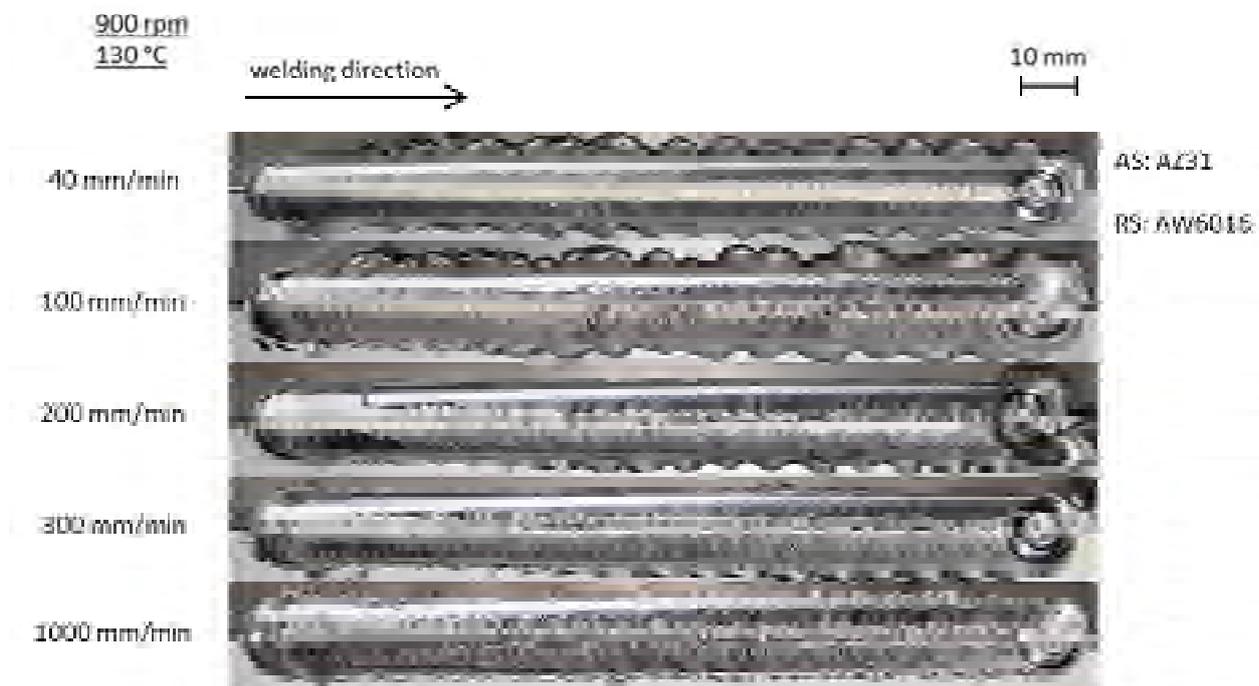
surface appearance for FSW of extruded AZ31/AW6016 for different welding speeds at a constant rotational speed of 900 rpm and 130 °C.
